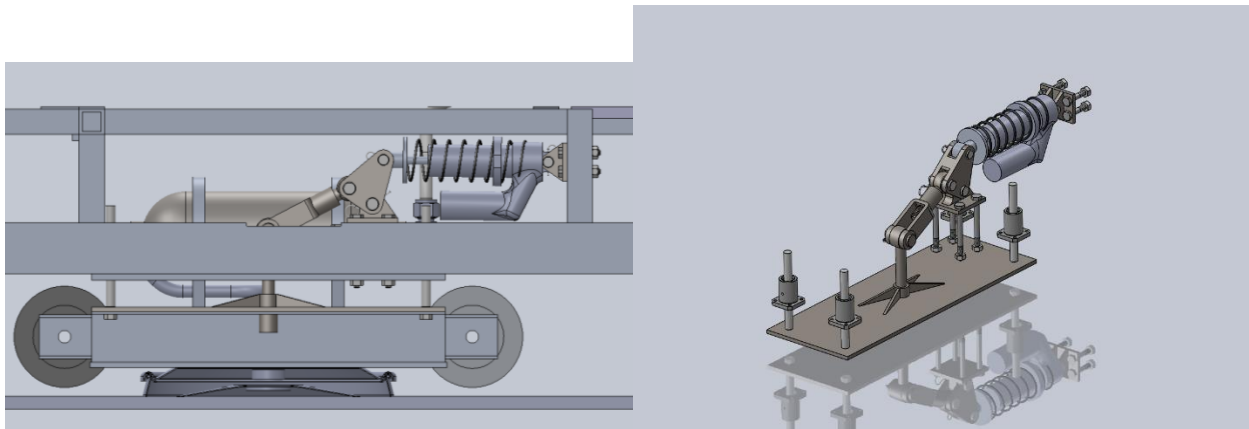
a) profile view of new suspension system fitting into the existing frame. b) Isometric view of the new suspension system assembly, which will be installed into the frame in the coming weeks.
